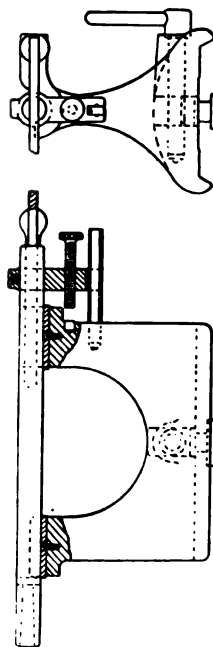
Open Type of Tailstock for Bench Lathe.
